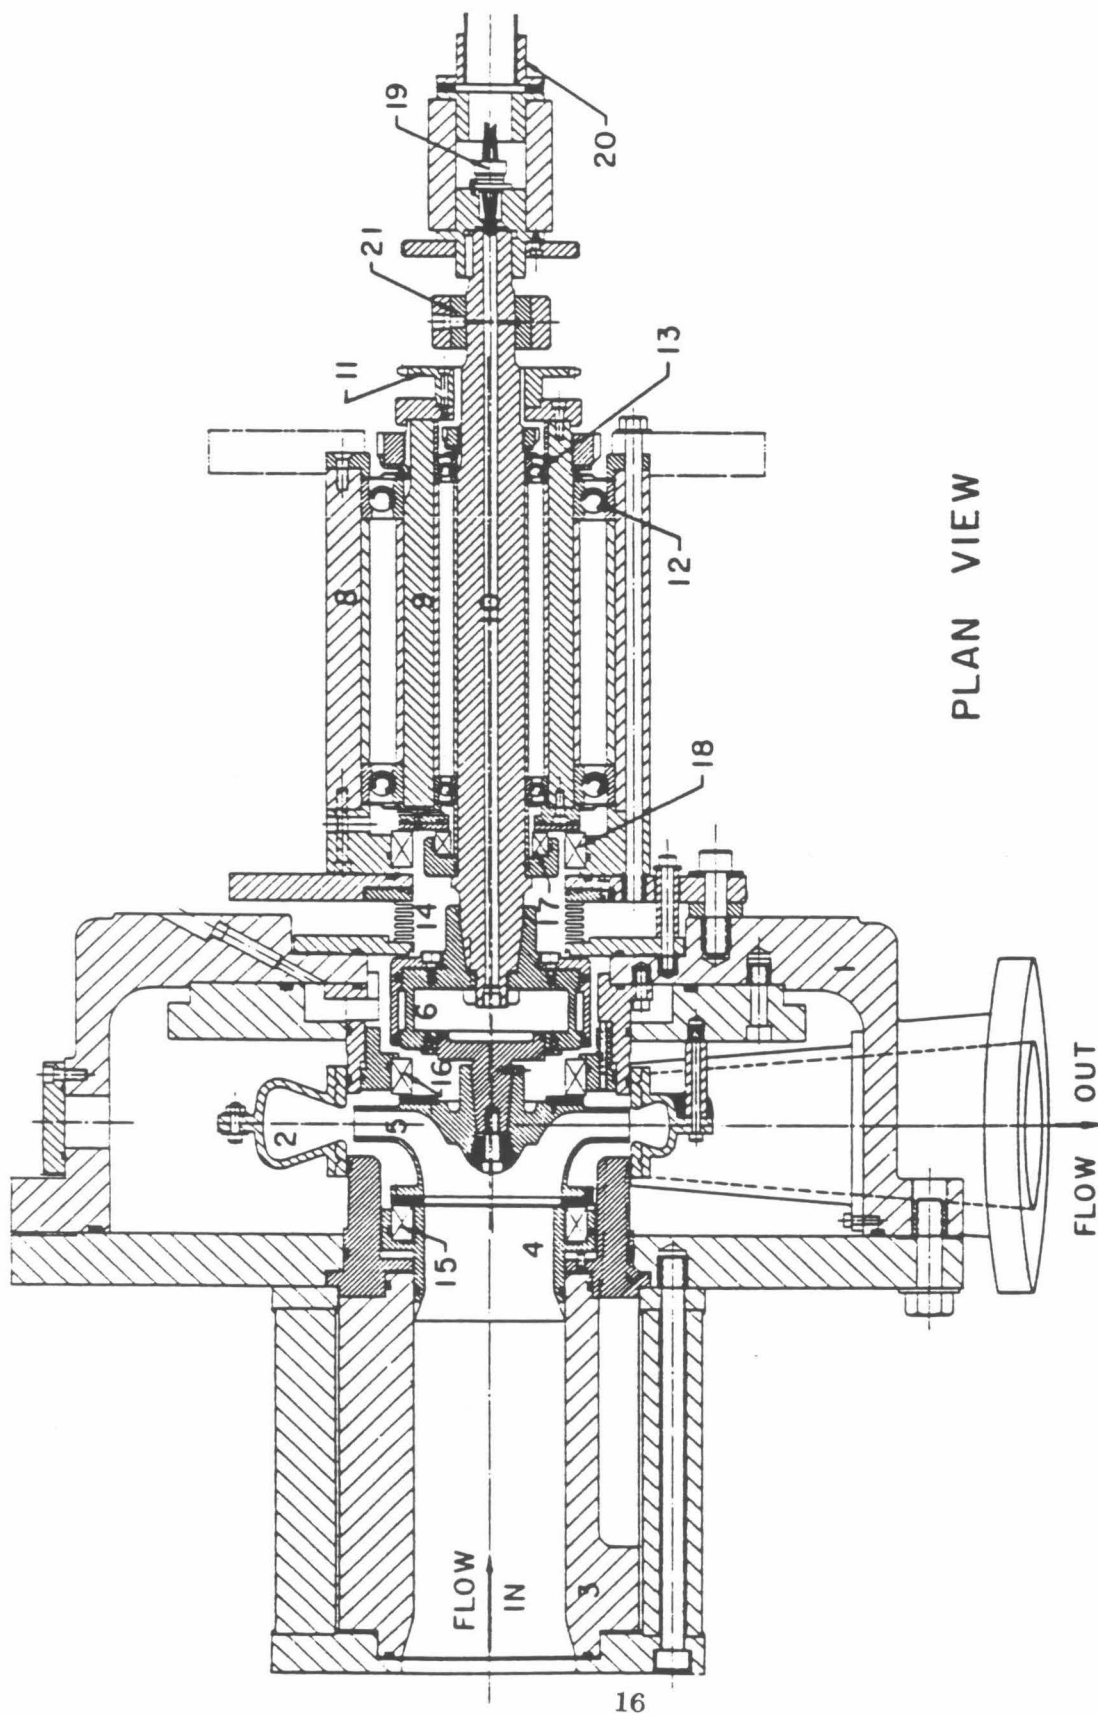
Assembly drawing of the test section and the eccentric drive mechanism. Pump housing (1), volute (2), inlet connection (3), inlet bell (4), impeller (5), rotating dynamometer (6), eccentric drive mechanism: outer and inner bearing carriers (8 and 9), main shaft (10), orbiting motion sprocket (11), outer and inner bearing sets (12 and 13), bellows (14), impeller front and back (removed) face seal (15 and 16), eccentric drive inner and outer face seals (17 and 18), strain gage cable connector (19), flexible coupling (20), and air bearing stator (21).
